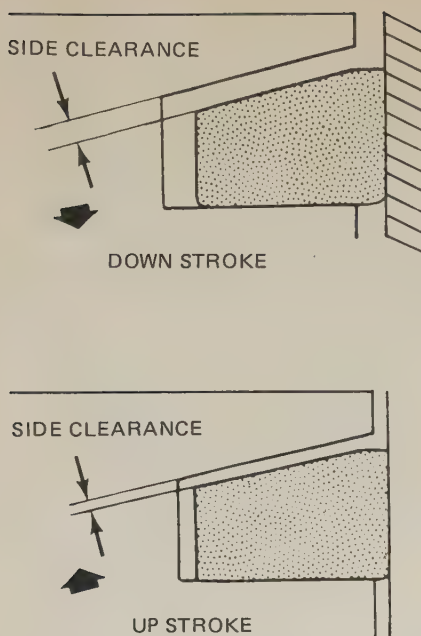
The in-and-out movement of the keystone piston ring tends to make it self-cleaning.
